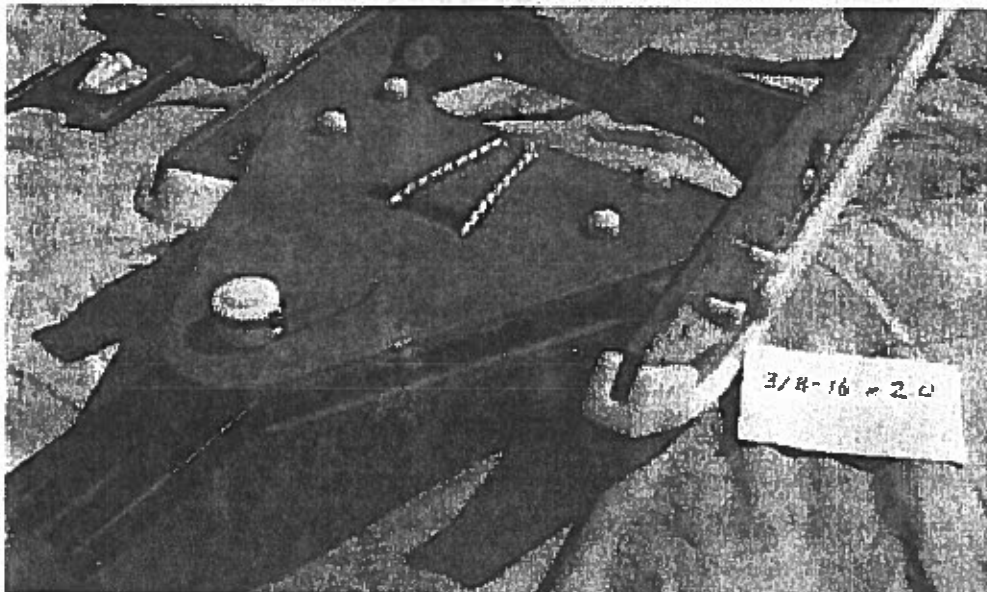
Steering yoke assembly mounted to skids, preparatory to tightening retention bolts.
